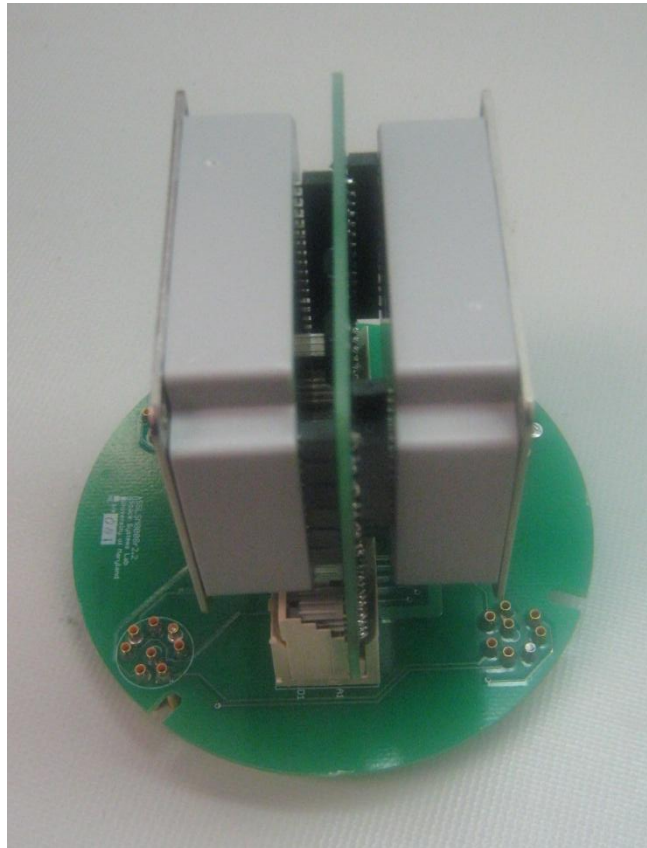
SAMURAI PCB/Motor Driver Assembly
